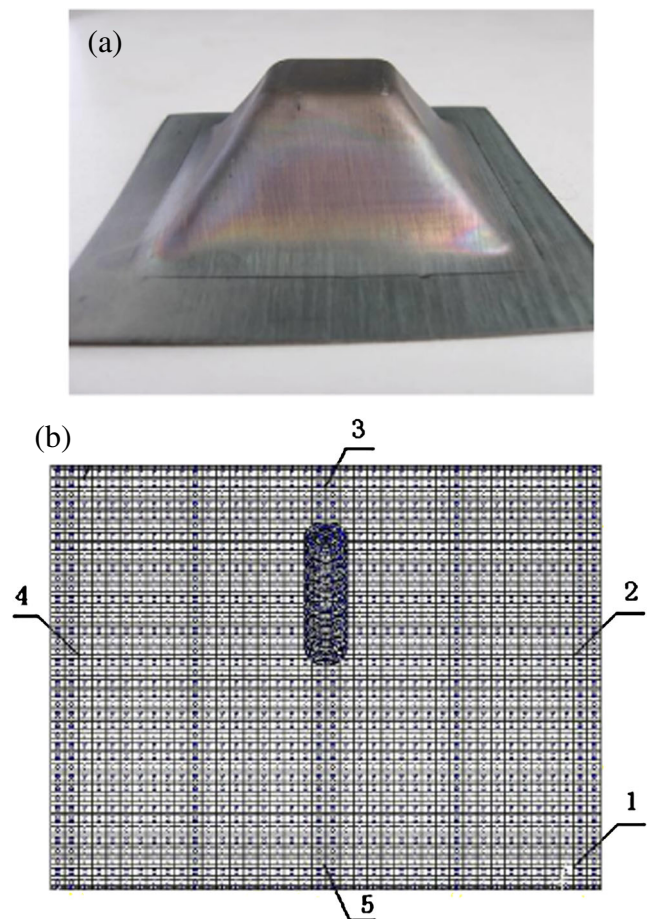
Schematic showing. a Workpiece. b Numerical model of sheet
